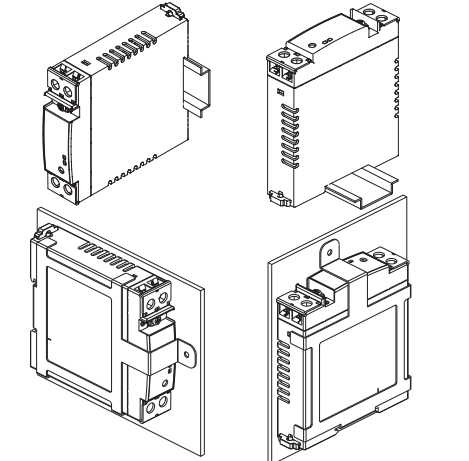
Mounting facing horizontally / Montage mit horizontaler Lage / Montage faisant face horizontalement
